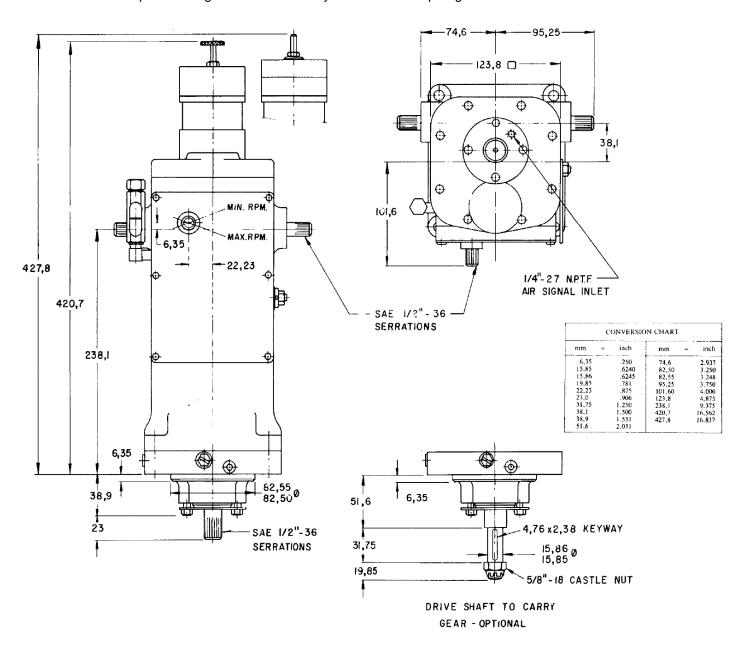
Typical UG Governor with Pneumatic Speed Setting Assembly (Do not use for construction)
